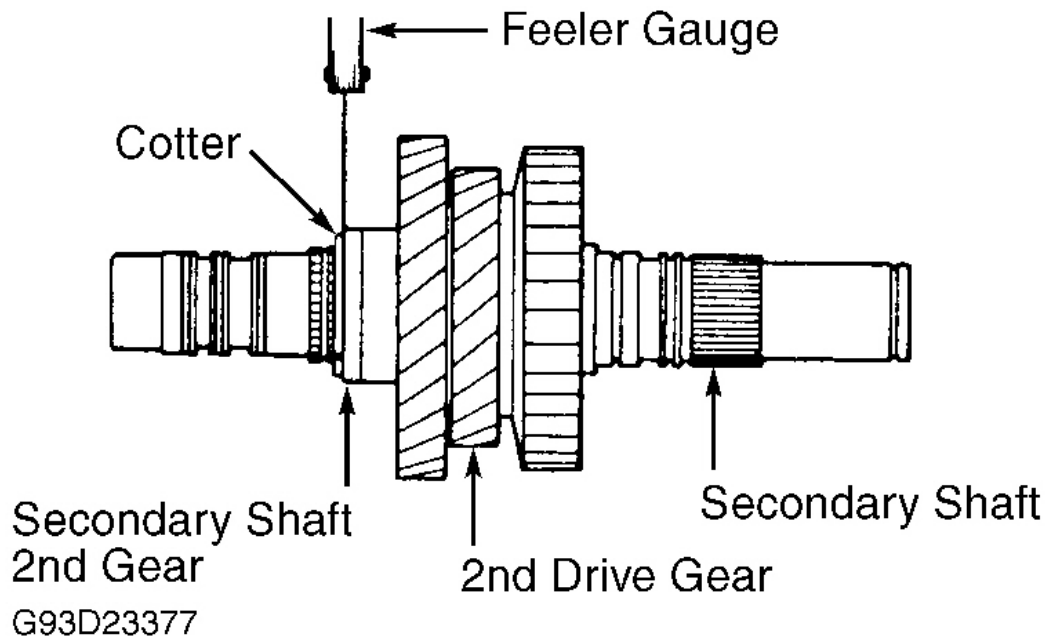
Checking Secondary Shaft 2nd Gear Clearance
